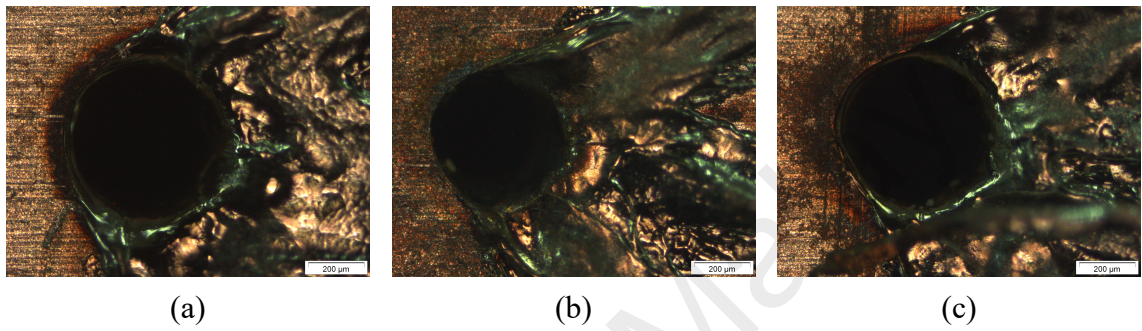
Holes top surfaces of 1000 μm SS304 sheet
